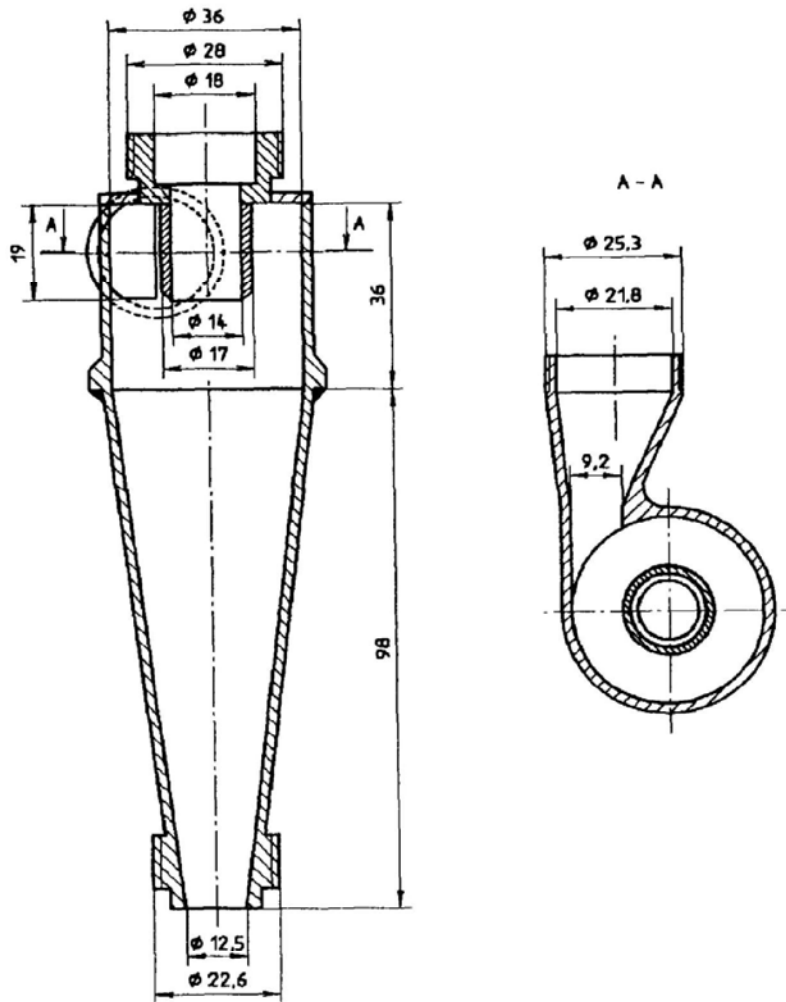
Dimensioned drawing of a cyclone (See, for example, BS 3405^[4].)
